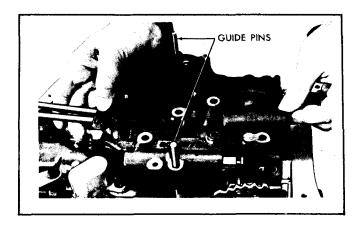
E-210 Installing Control Valve Assembly and Governor Pipes
